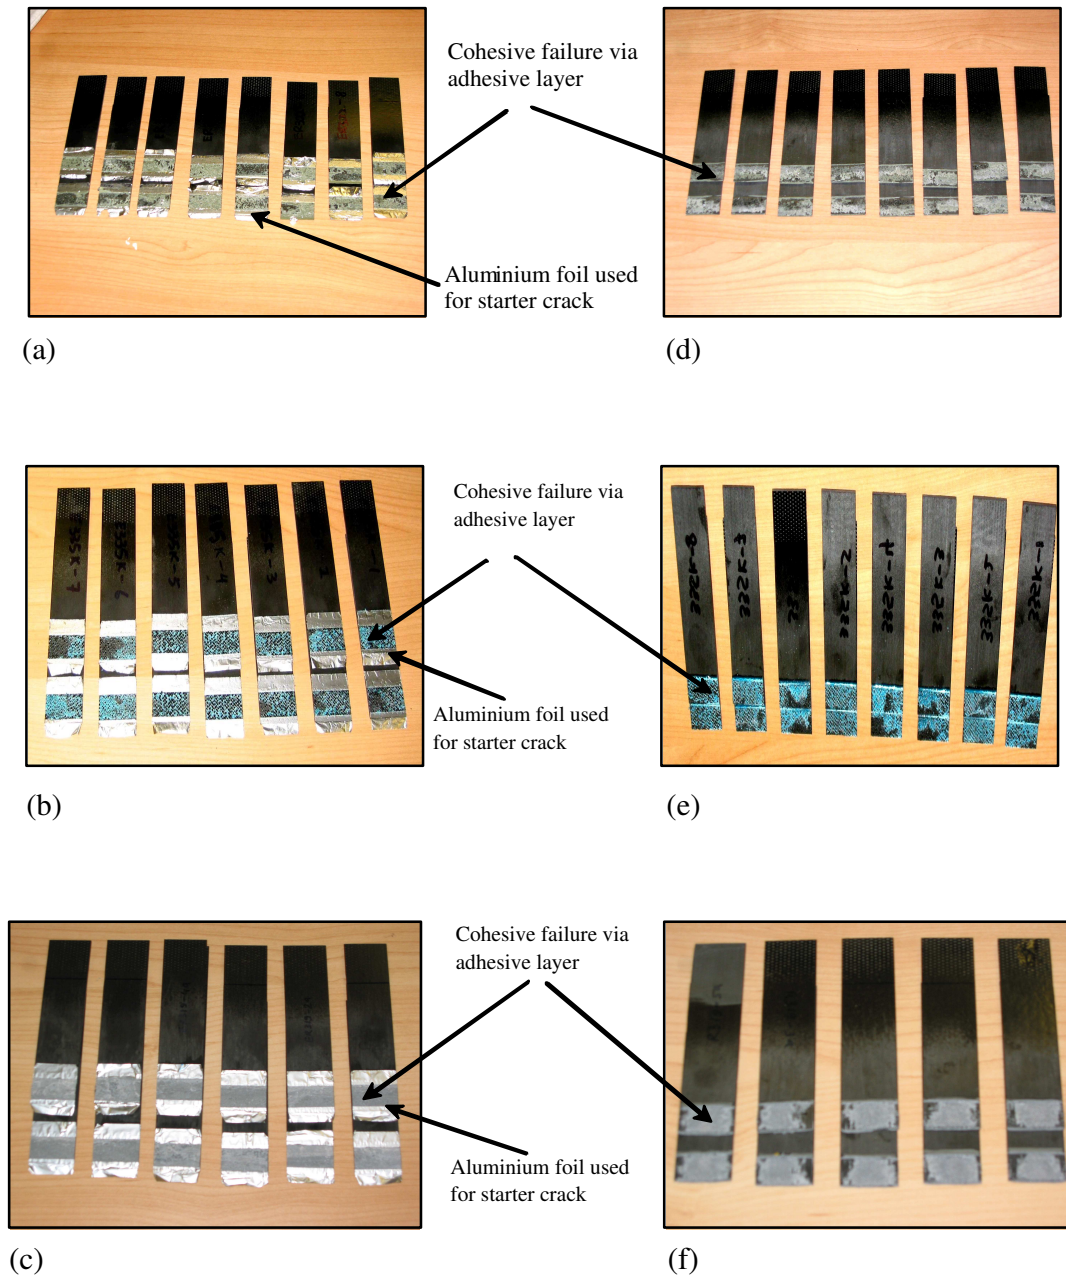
Photographs of fractured surfaces of MSLJ specimens showing cohesive failure via adhesive layer, (a) Redux 322 (b) Redux 335K, and (c) Redux 319A; Photograph of fractured surface of conventional SLJ specimens showing cohesive failure via adhesive layer, (d) Redux 322 (e) Redux 335K, and (f) Redux 319A.
